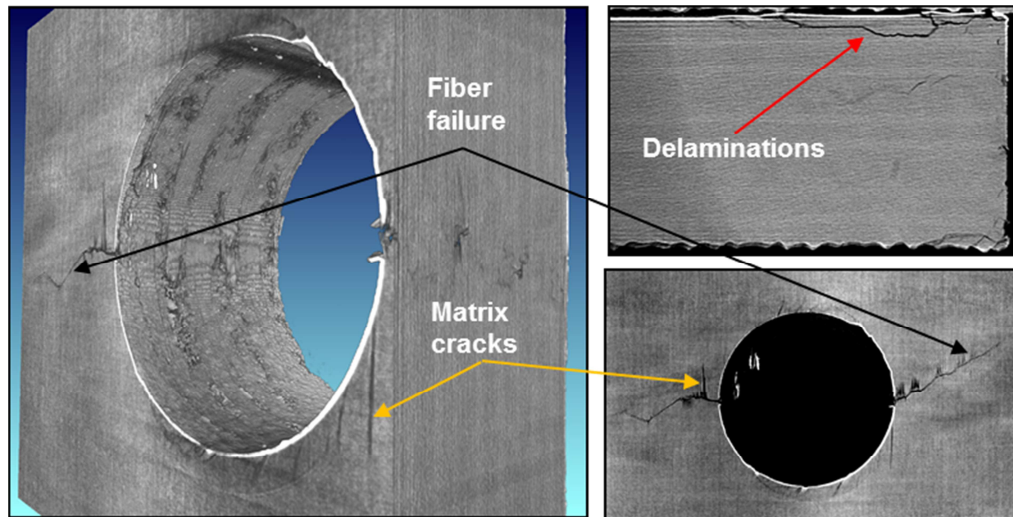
3D CT reconstruction of OHC specimen showing structural damage after 10,000 lbs (44.5 kN) compressive loading
